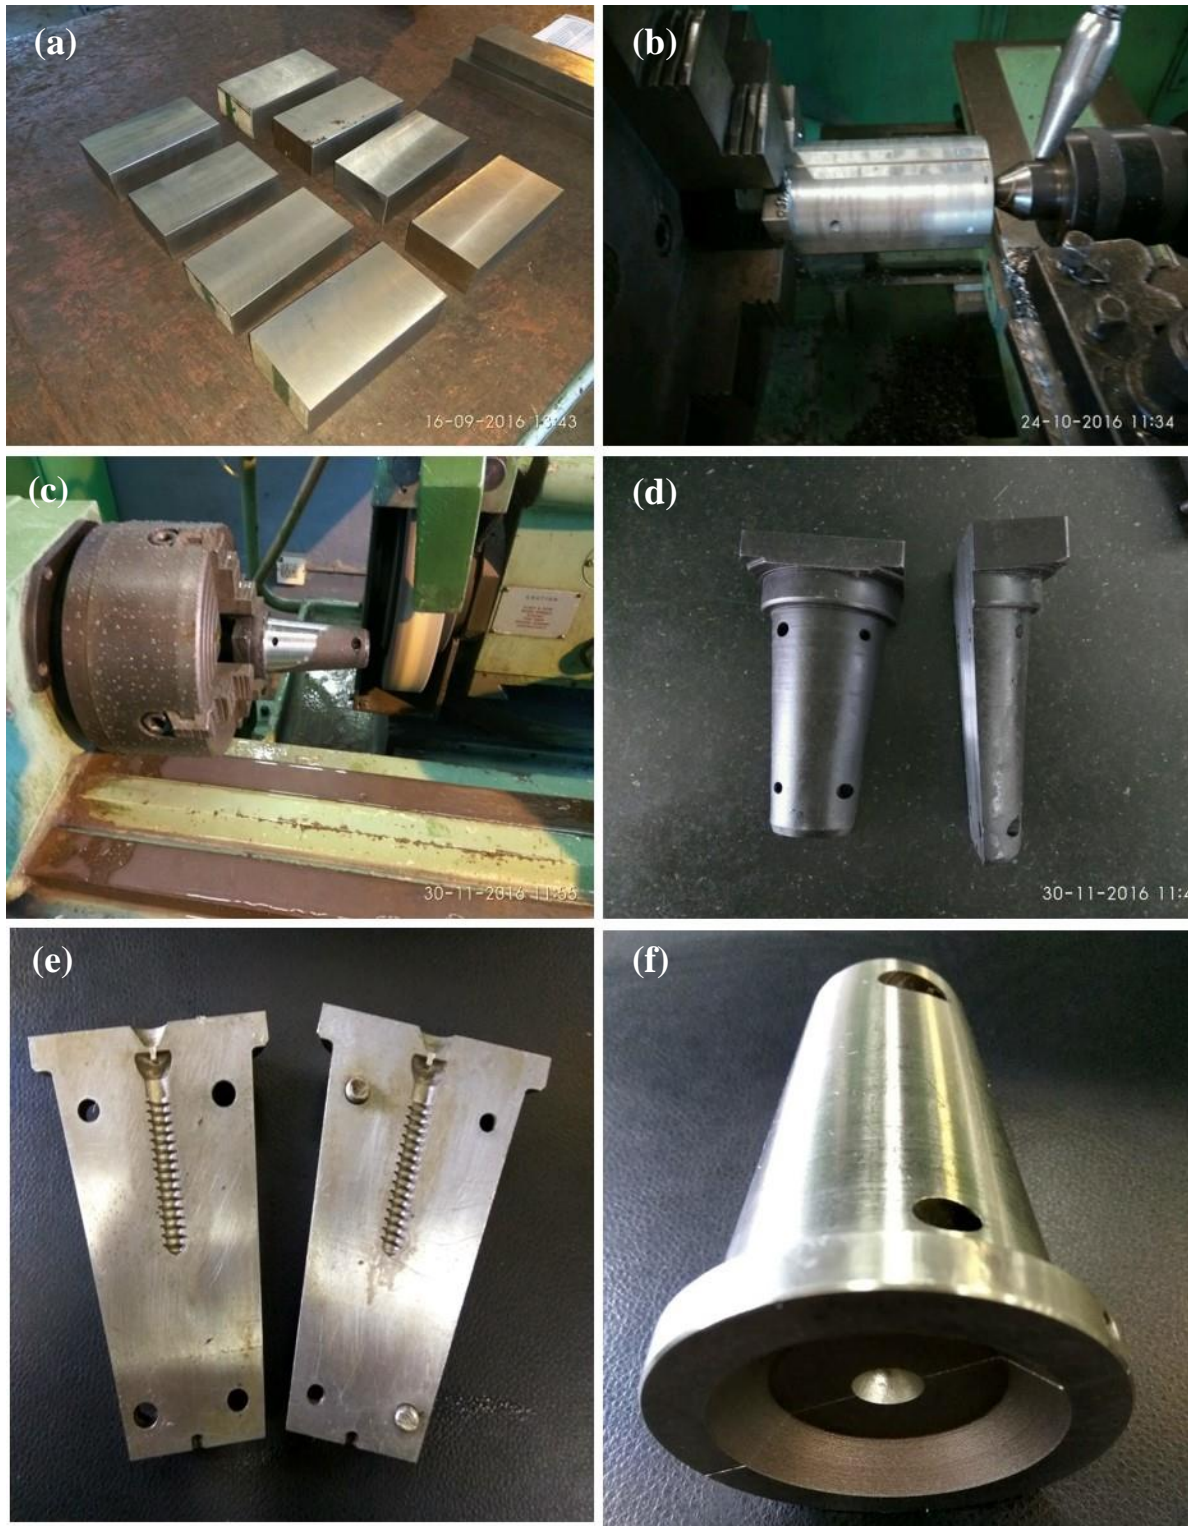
Schematic diagrams for fabrication of cortical screw molds. (a) H13 material for mold (b) machining in lathe machine (c) surface grinding (d) Heat treated mold (e) mold in final shape (f) side view of screw mold.
